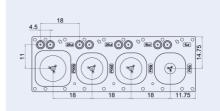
Schematic drawing of blister test chip 1021 with metering system – view from top
